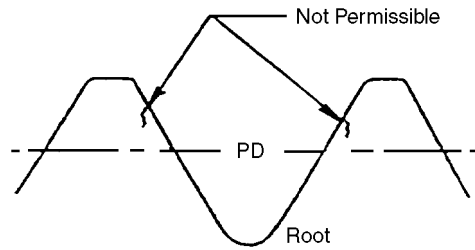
LAPS ABOVE PD EXTENDING TOWARD ROOT, ROLLED THREAD
